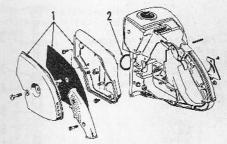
Exploded view of fuel tank, air box and rear handle typical of early models. Carburetor and reed valve are attached to the handle casting and casting is sealed to crankcase by "O" ring (2). Several variations of the air intake and filter (1) have been used.
